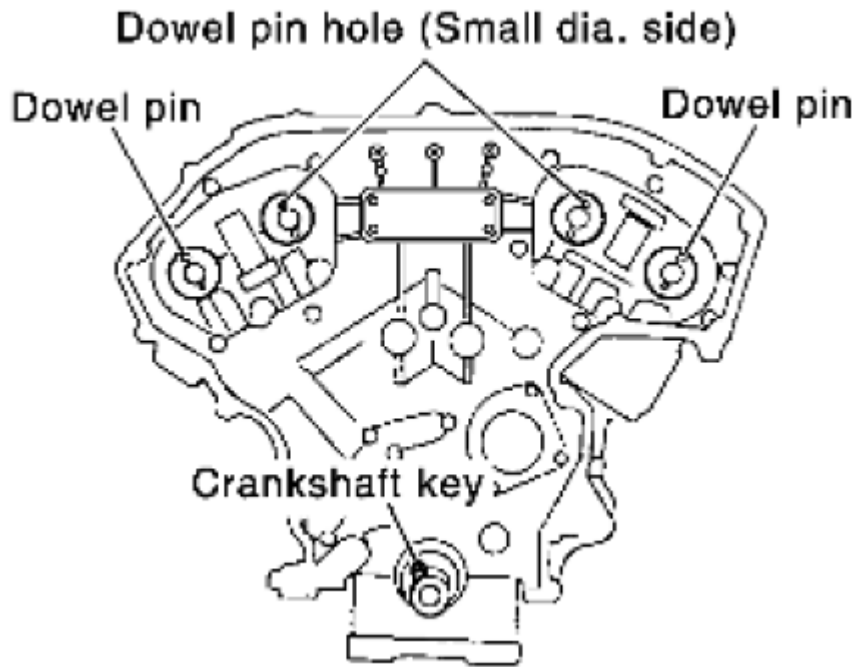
Identifying Dowel Pin And Crankshaft Key
